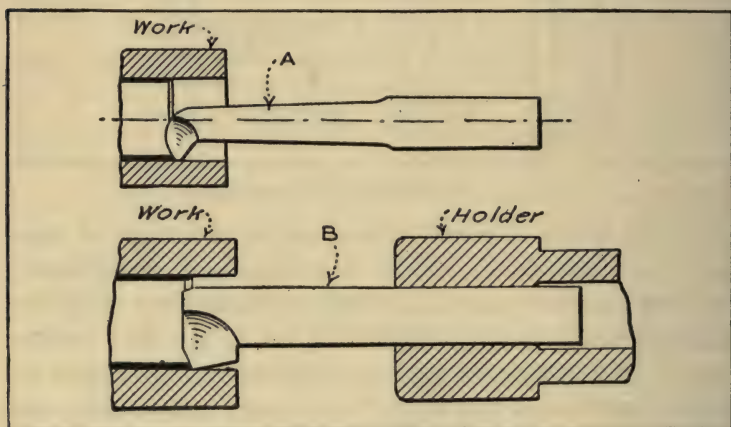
SIMPLE TYPES OF BORING TOOLS
